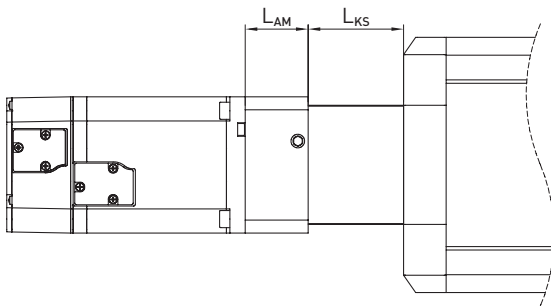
Motor connection of linear tables HT-S without belt drive
